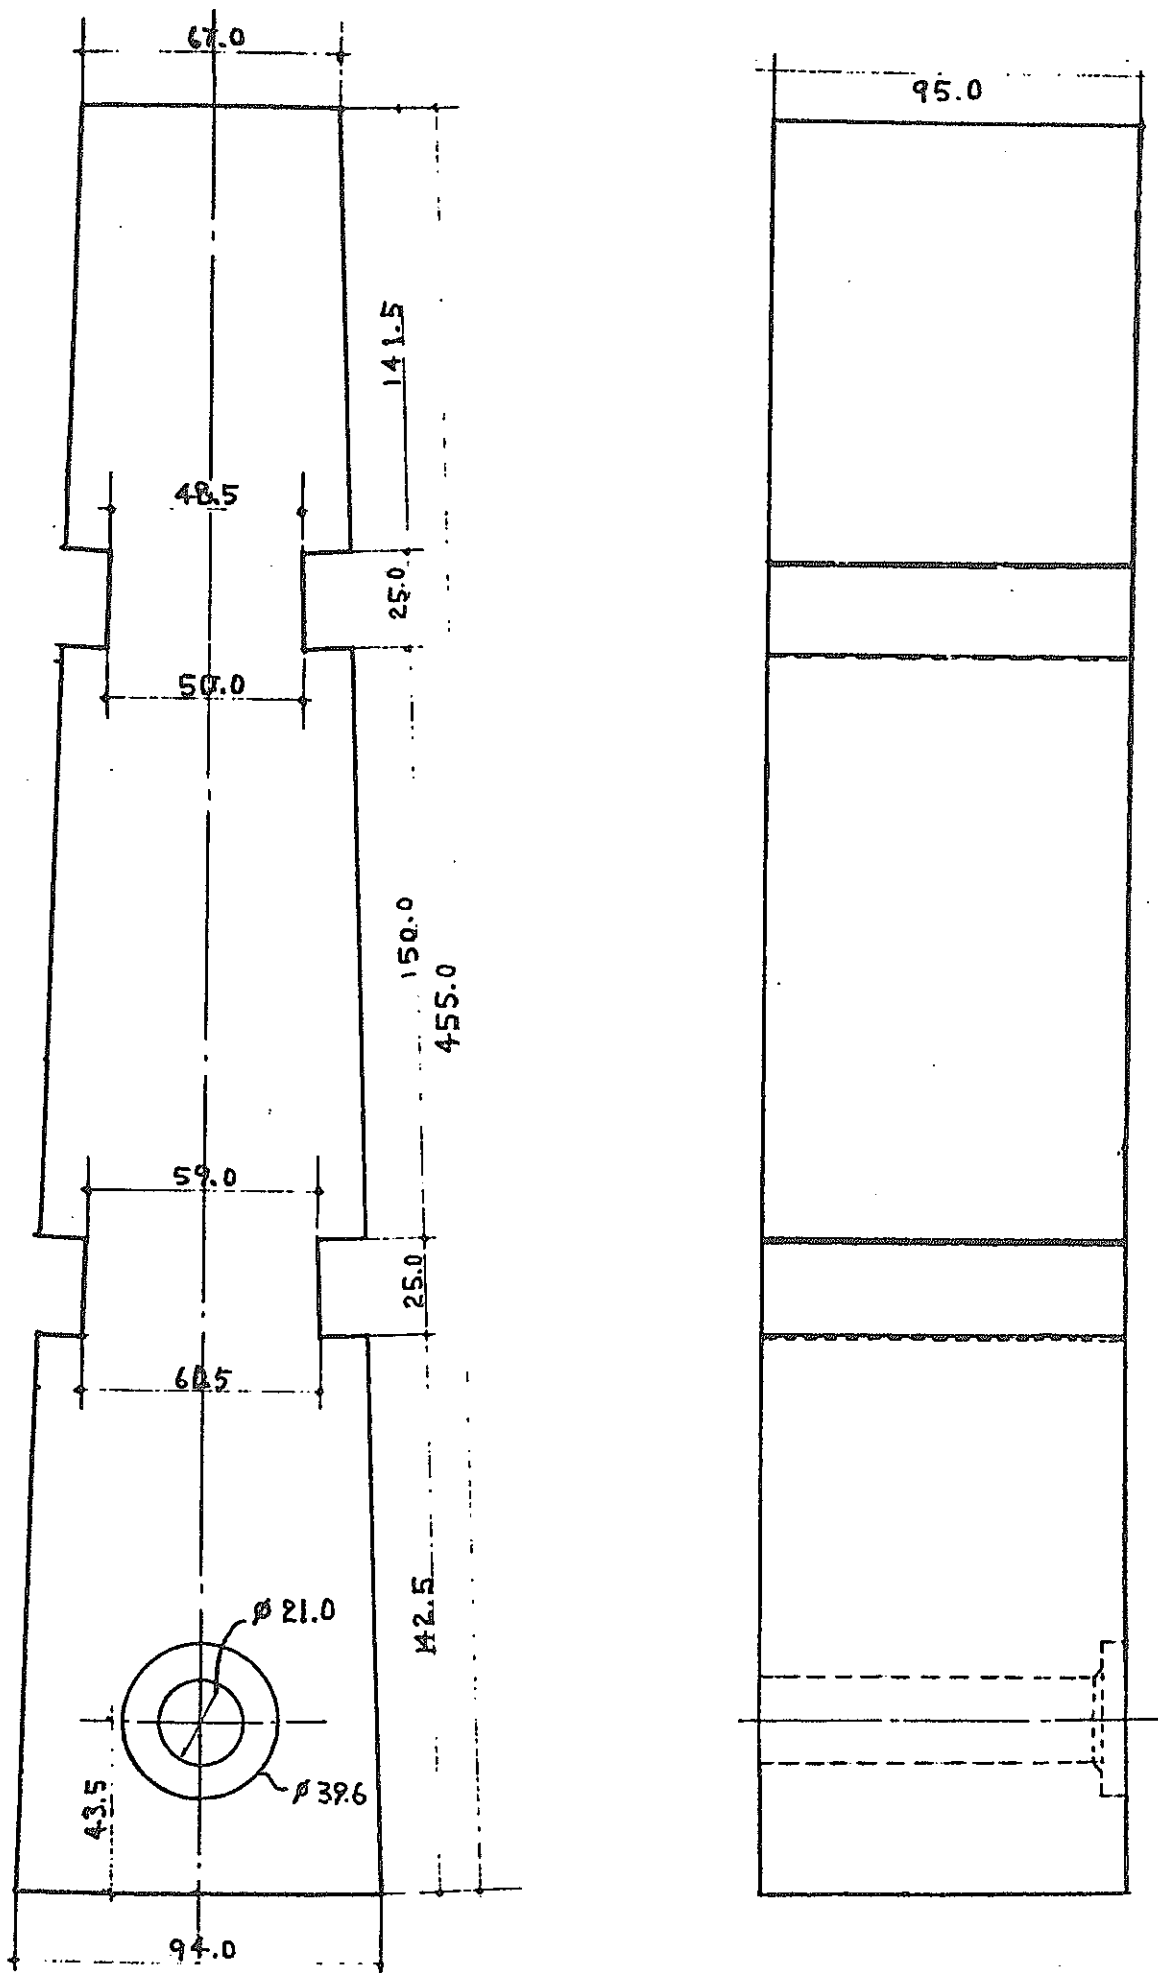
Fig. III-I-VI Dimensions of Graphite Shielding Blocks
